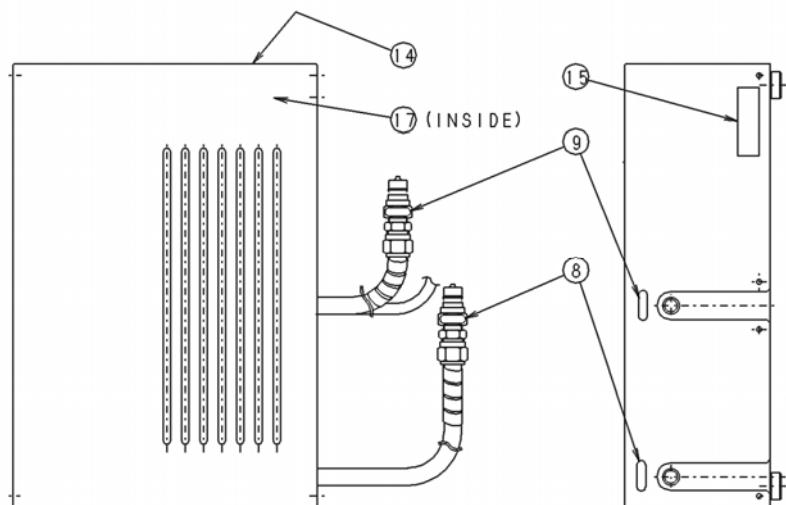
LABELS ON HEAT EXCHANGER HE-12S
